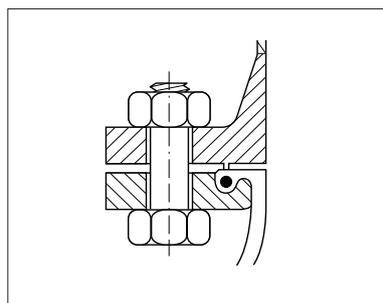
Do not use flange with tongue or groove which will damage the rubber.
